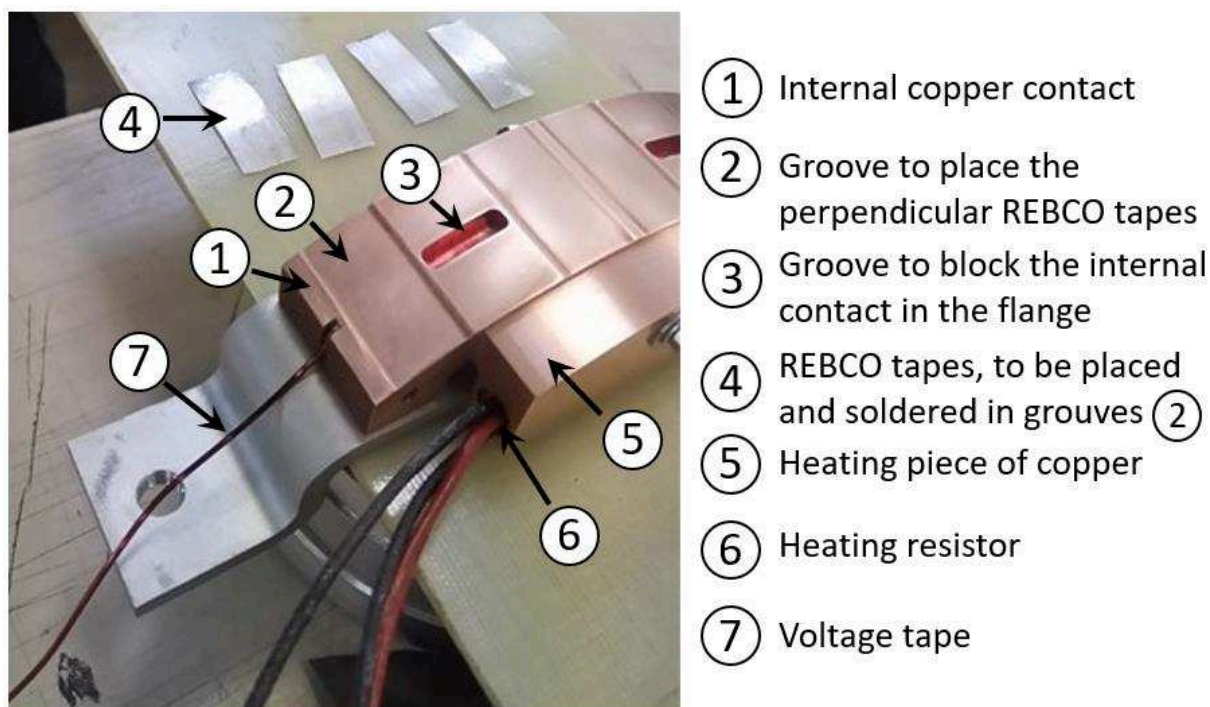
An inner contact, just before the soldering of perpendicular REBCO tapes.
